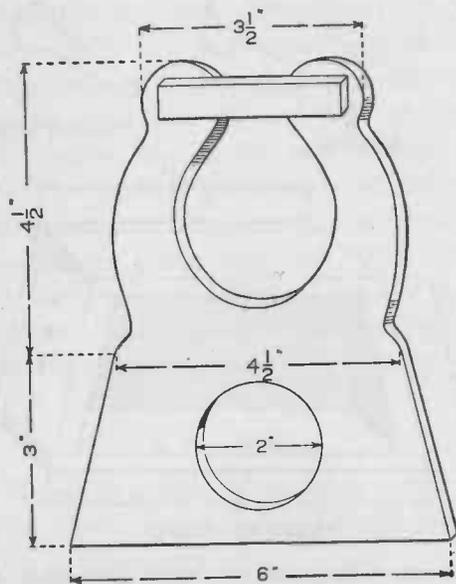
The sounding board which closes the front of the box is a lyre-shaped piece of wood as shown in the sketch above.
